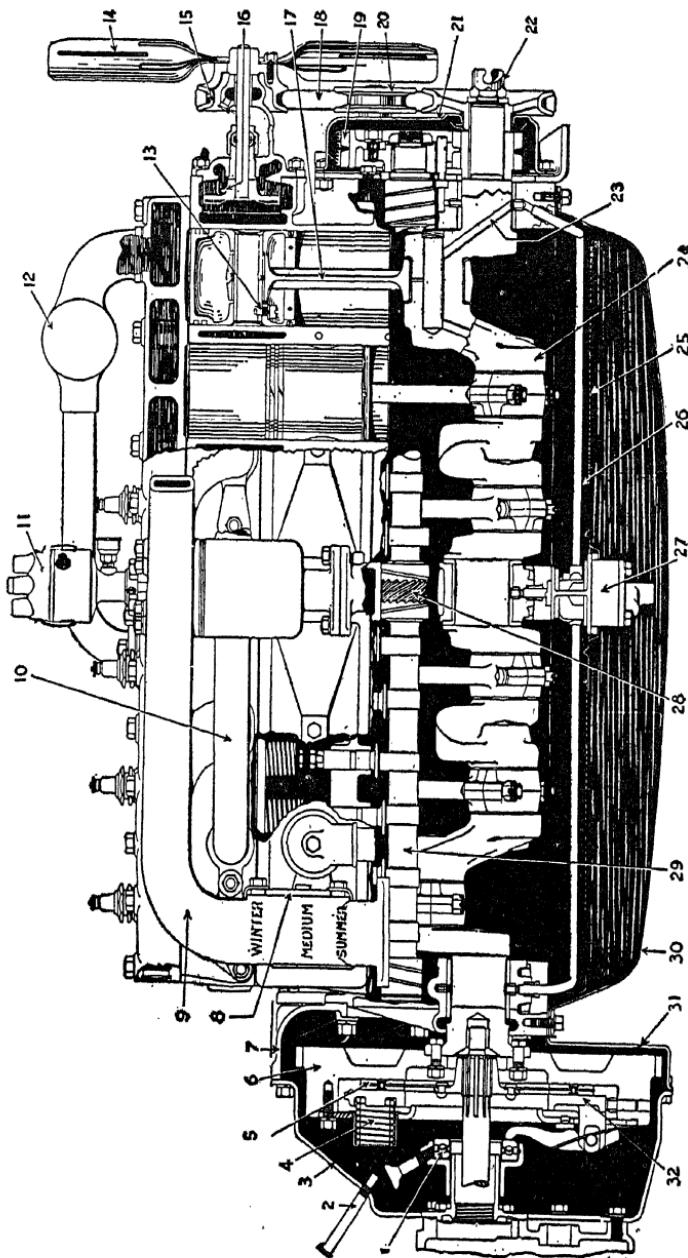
Sectional Side View of Pontiac Engine and Clutch
